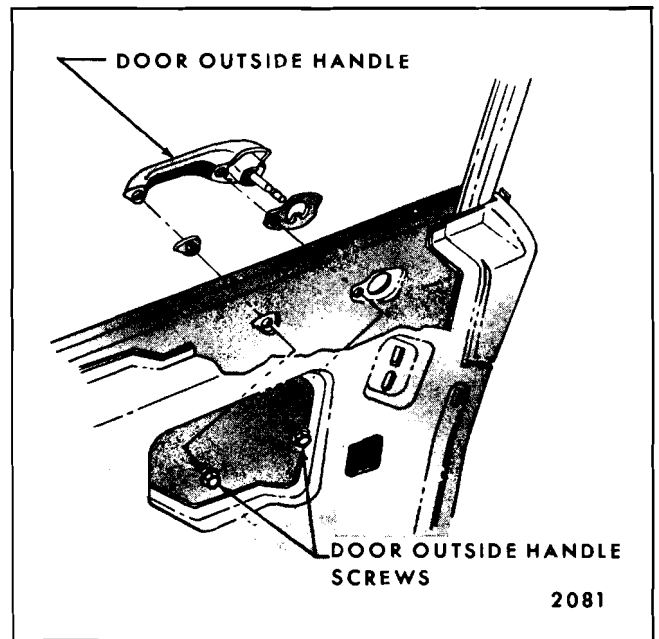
Door Outside Handle Removal - "G" Styles
